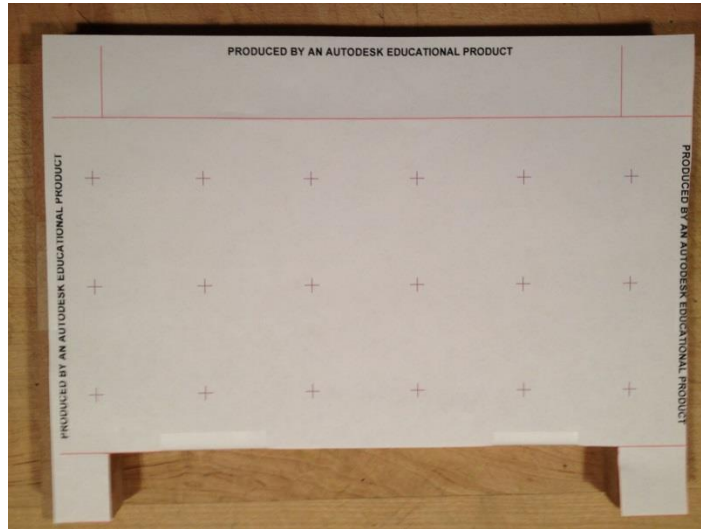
Printed 2D CAD drawing with circle centers marked. Used for drilling screw holes for the impact rods.
